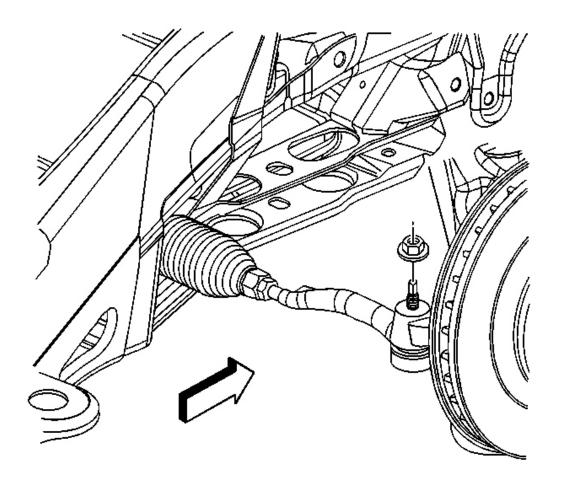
View Of Tie Rod Retaining Nut Courtesy of GENERAL MOTORS CORP.
